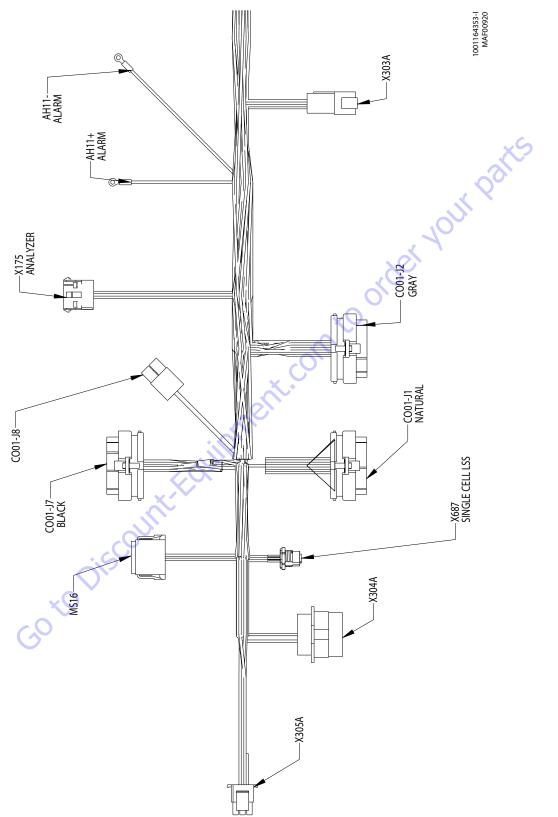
Platform Control Box Harness Without Skyguard - Sheet 2 of 12
